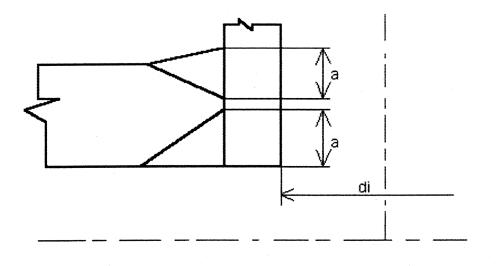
Definition of "a" for types of weld 17, 18 and 19
